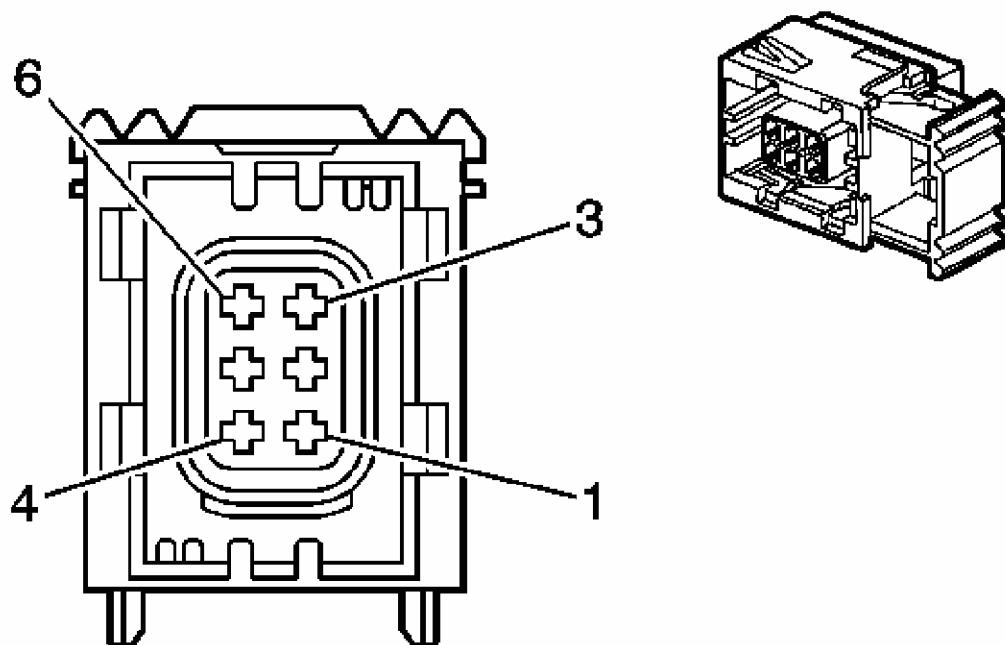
Door Latch Assembly - Front Passenger Connector End View
